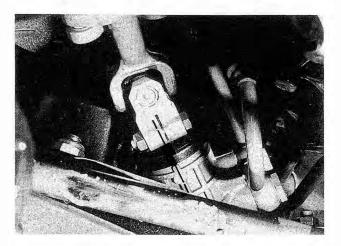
Marks on steering gear housing align as shown when steering gear is centered and front wheels are in straight-ahead position.
